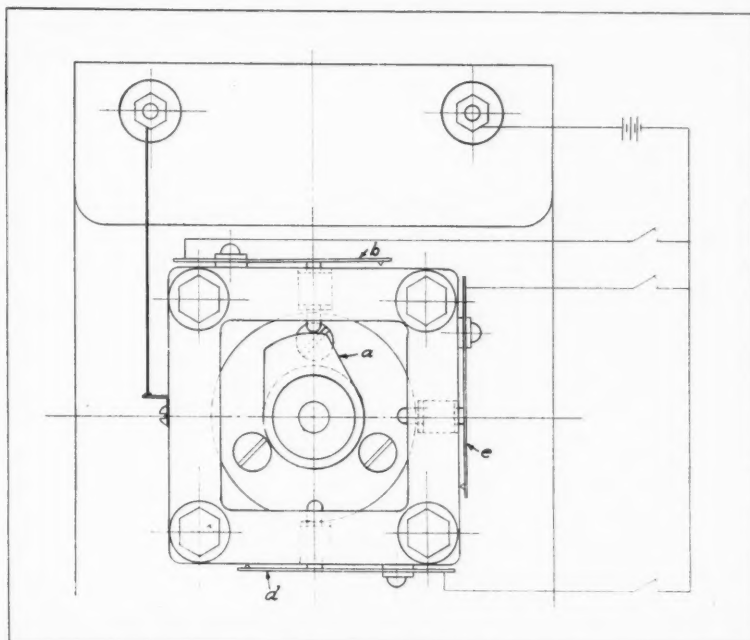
View Showing the Arrangement of Cam "a" and its Electrical Contacts at the Right-hand End of Fig. 2
